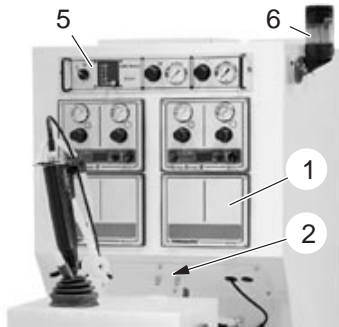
Slide-in chassis (equipped with two PFC control units), sensor
